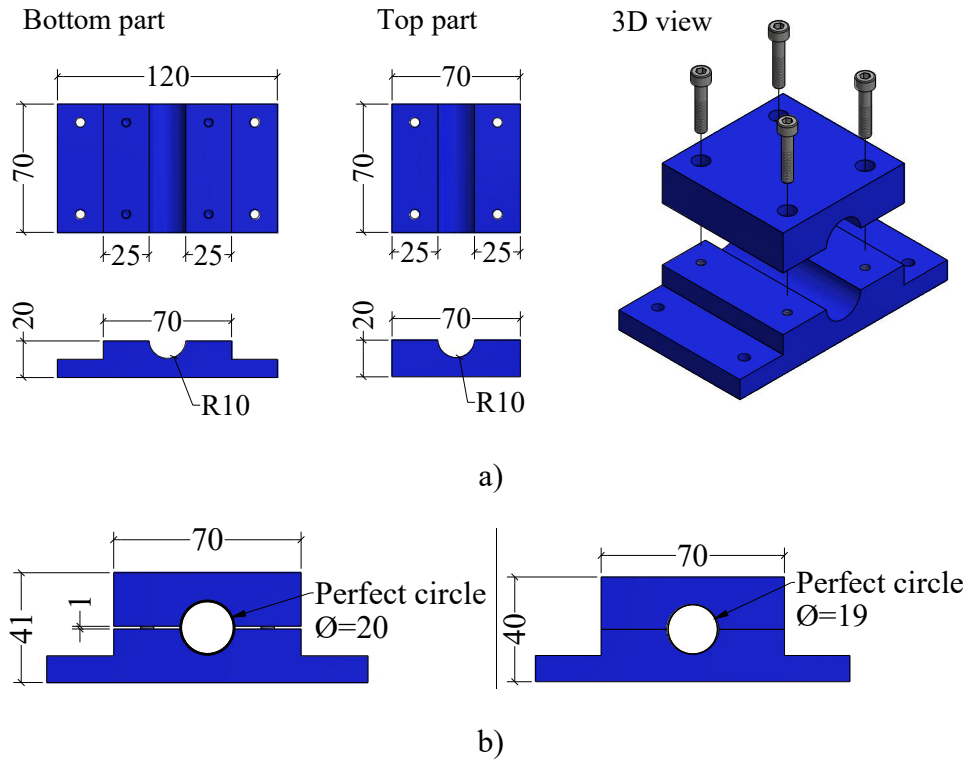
New EMM-ARM supports for cement paste tests: a) Disassembled scheme; b) Assembled scheme.
